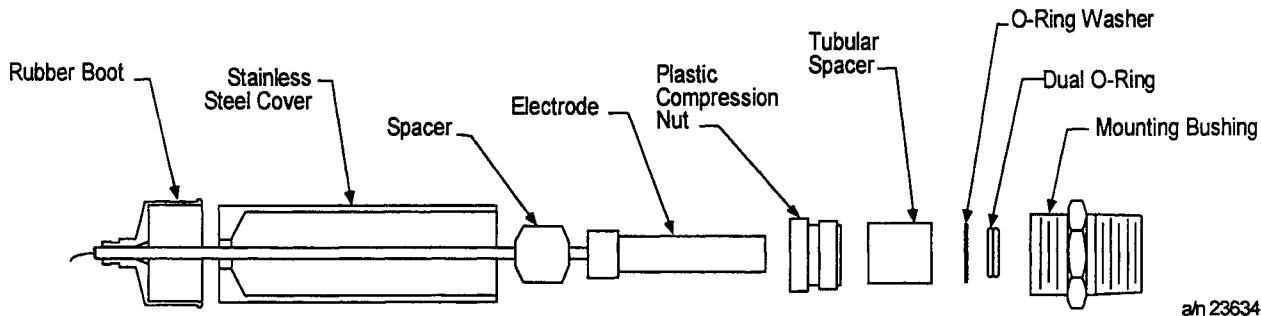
7758 Electrode Mounting Internal Parts, Arranged in Order of Assembly
